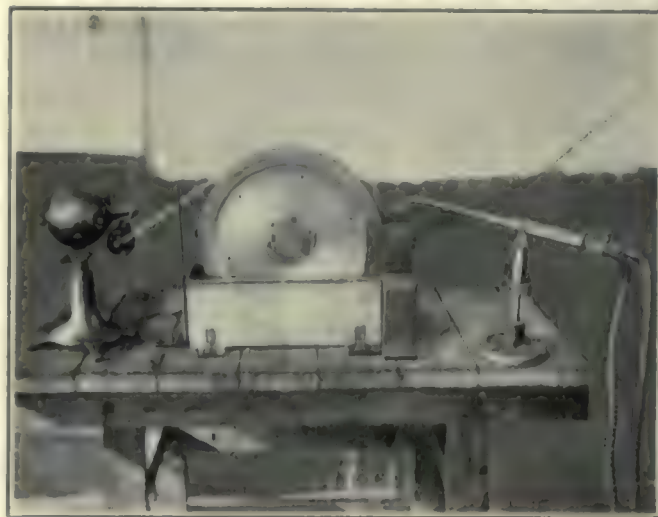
THE DEVICE WITH A GEAR IN PLACE
